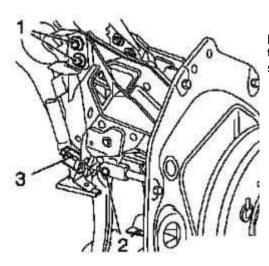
Removing the brake pedal: 1 - bolts, 2 - attachment bolt the brake pedal, 3 - switch braking signal
